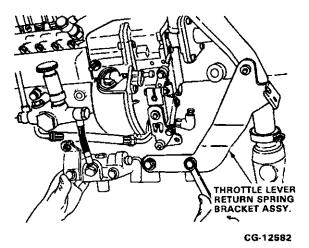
Install Throttle Lever Return Spring Bracket (Current Production)
